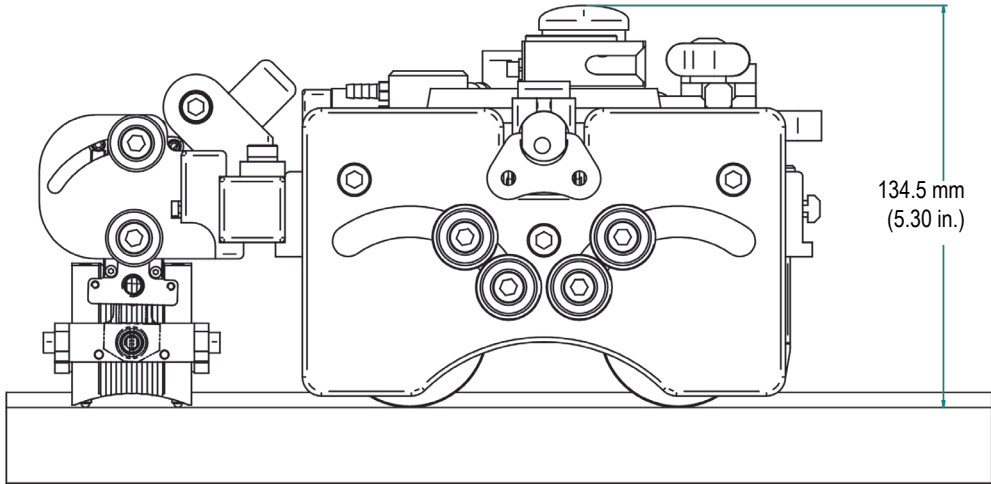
WeldROVER – clearance with low-profile configuration – flat surface
